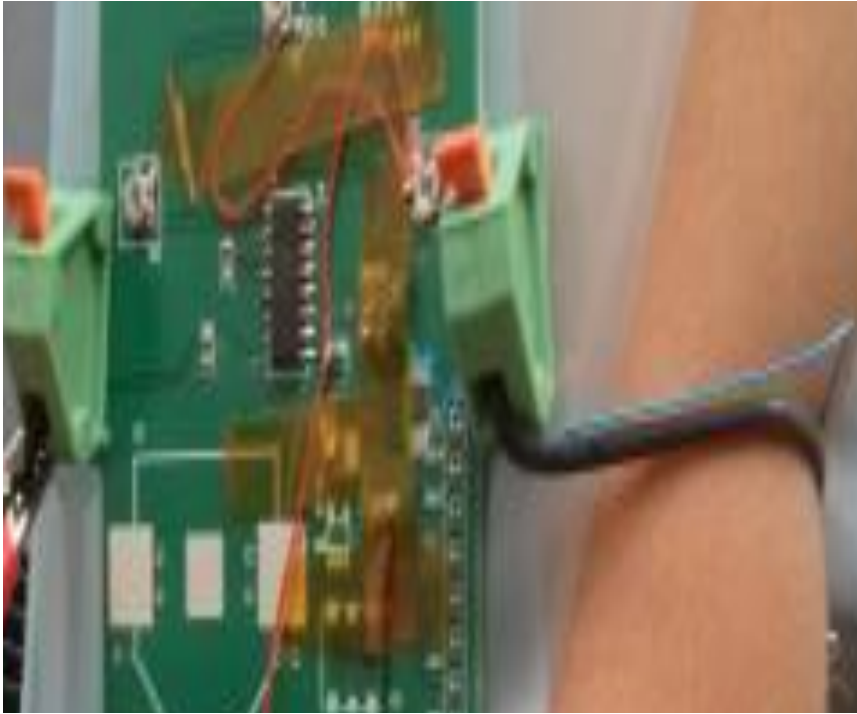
Fabricated PCB with parts soldered and ready for testing on human subjects.
